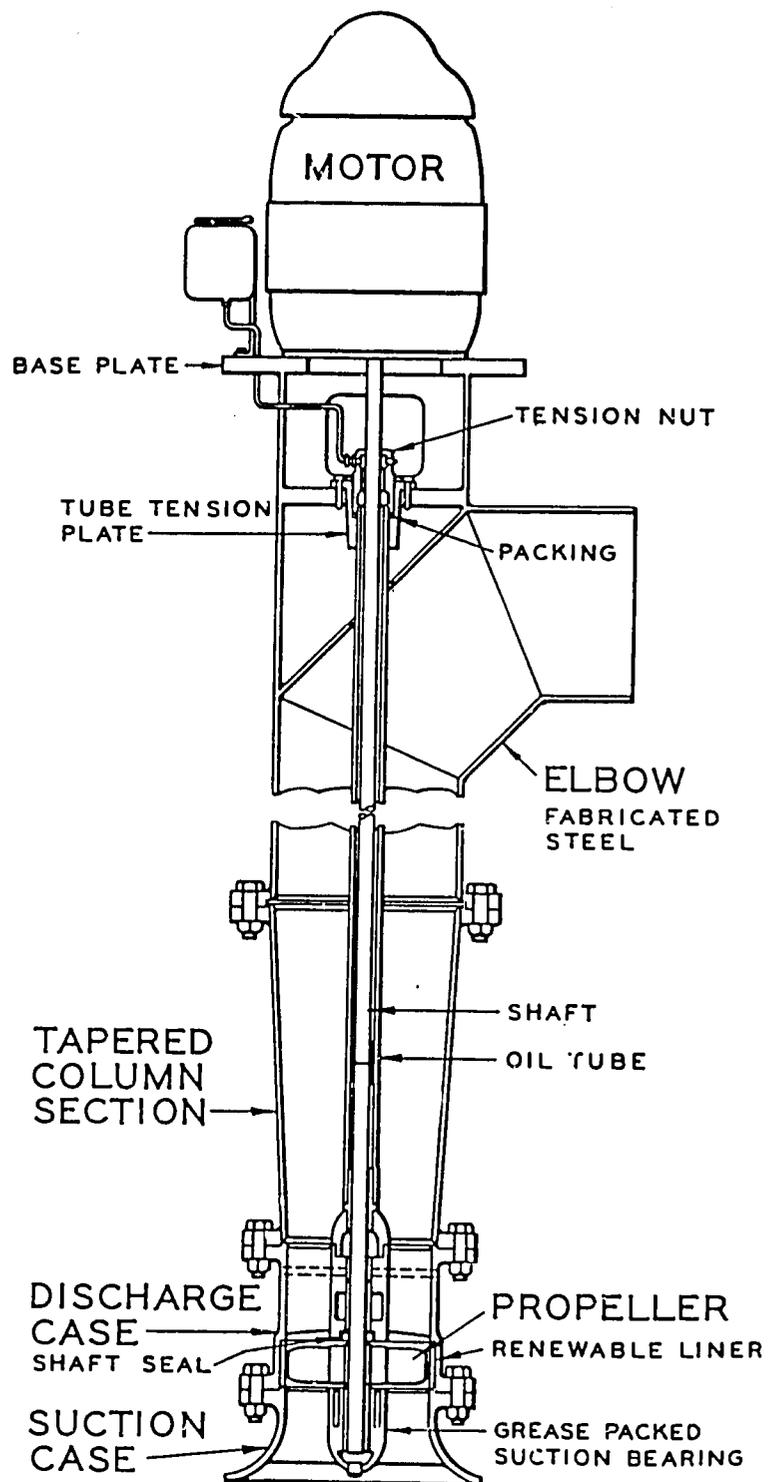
Propeller Pump below base discharge - oil lubricated.
